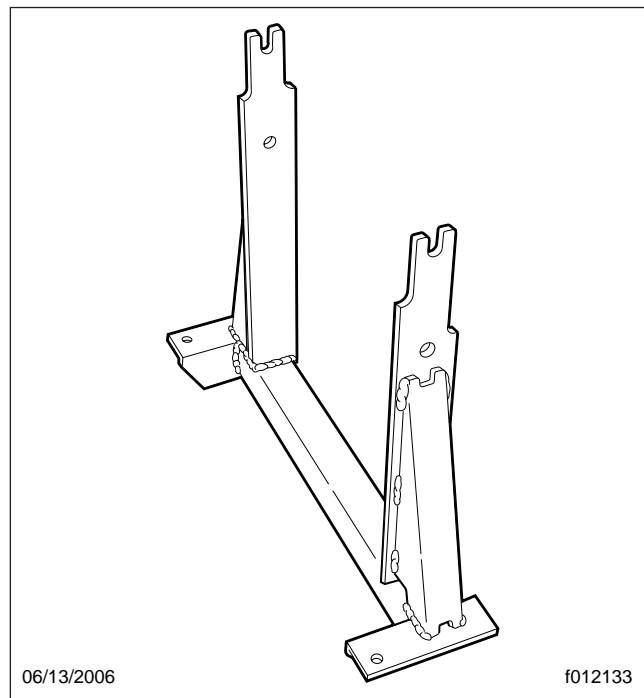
, Engine Shipping Stand, Detroit Diesel Series 60 Engine
